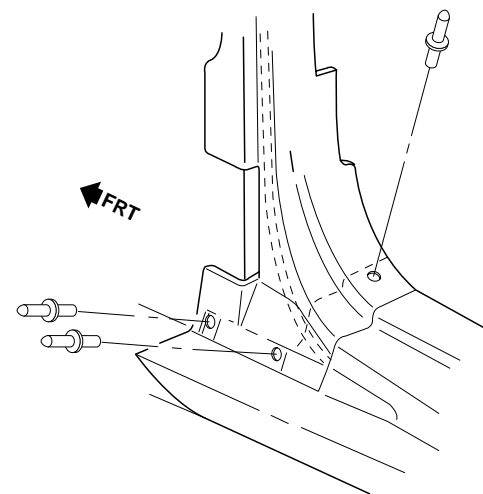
Service Part Can Be Separated at the Bonded and Riveted Joint
